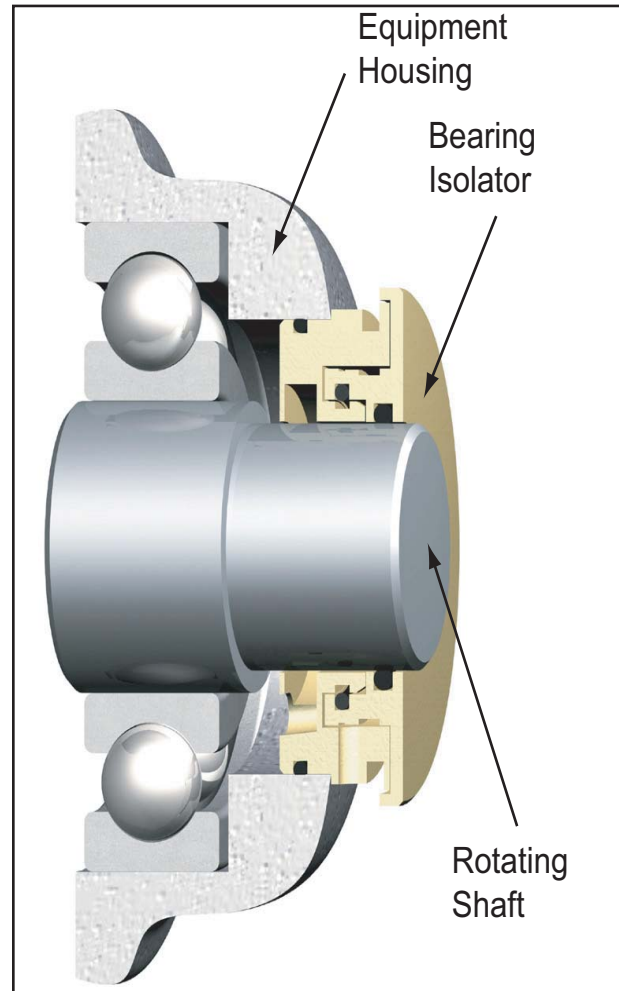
Typical Bearing Isolator (3-D Cutaway View)
